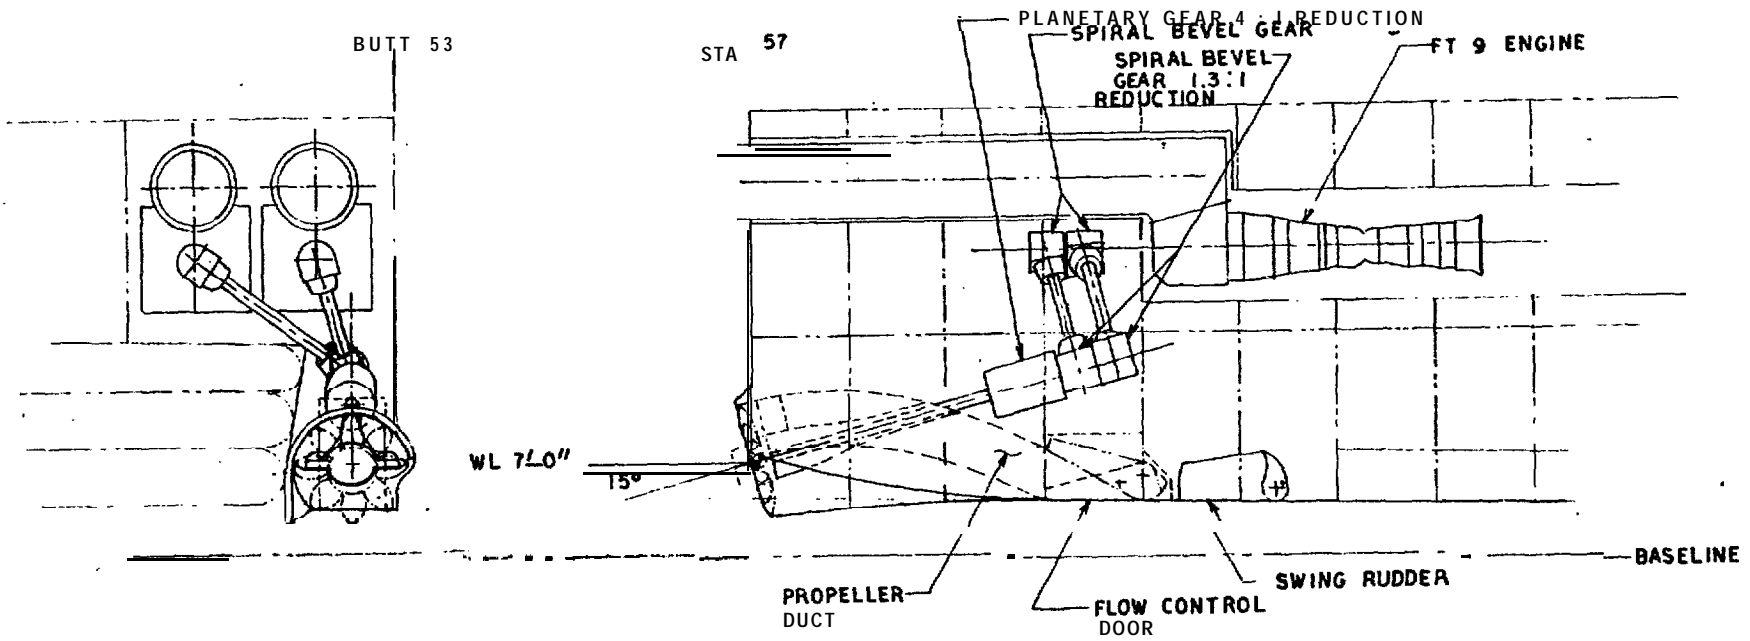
CASE 3 - INCLINED PROPELLER WITH SPIRAL BEVEL GEAR AND PLANETARY GEARS, LOW-LEVEL WATER INTAKE
